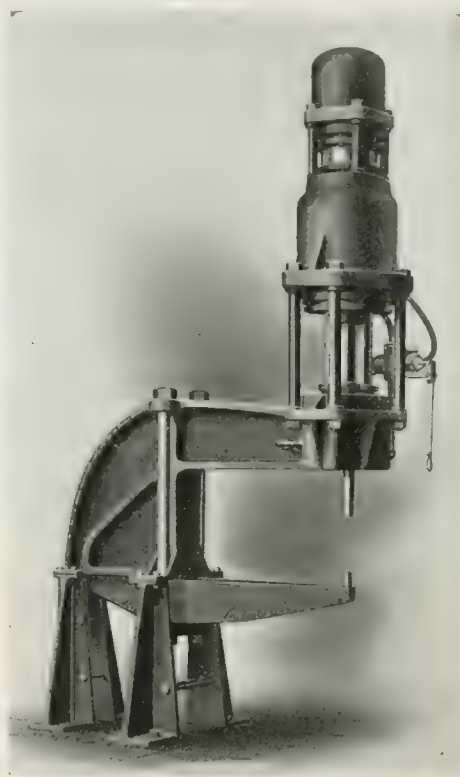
50 TON HYDRAULIC RIVETING PRESS
